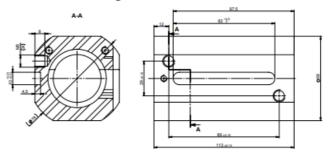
Type 4503B... Size 3 All dimensions without tolerances comply with ISO 2768-mH
